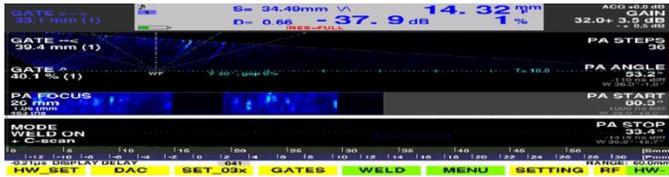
Ultrasonic phase array Defectogram of welded HE15 material Defect at 0.66mm depth
